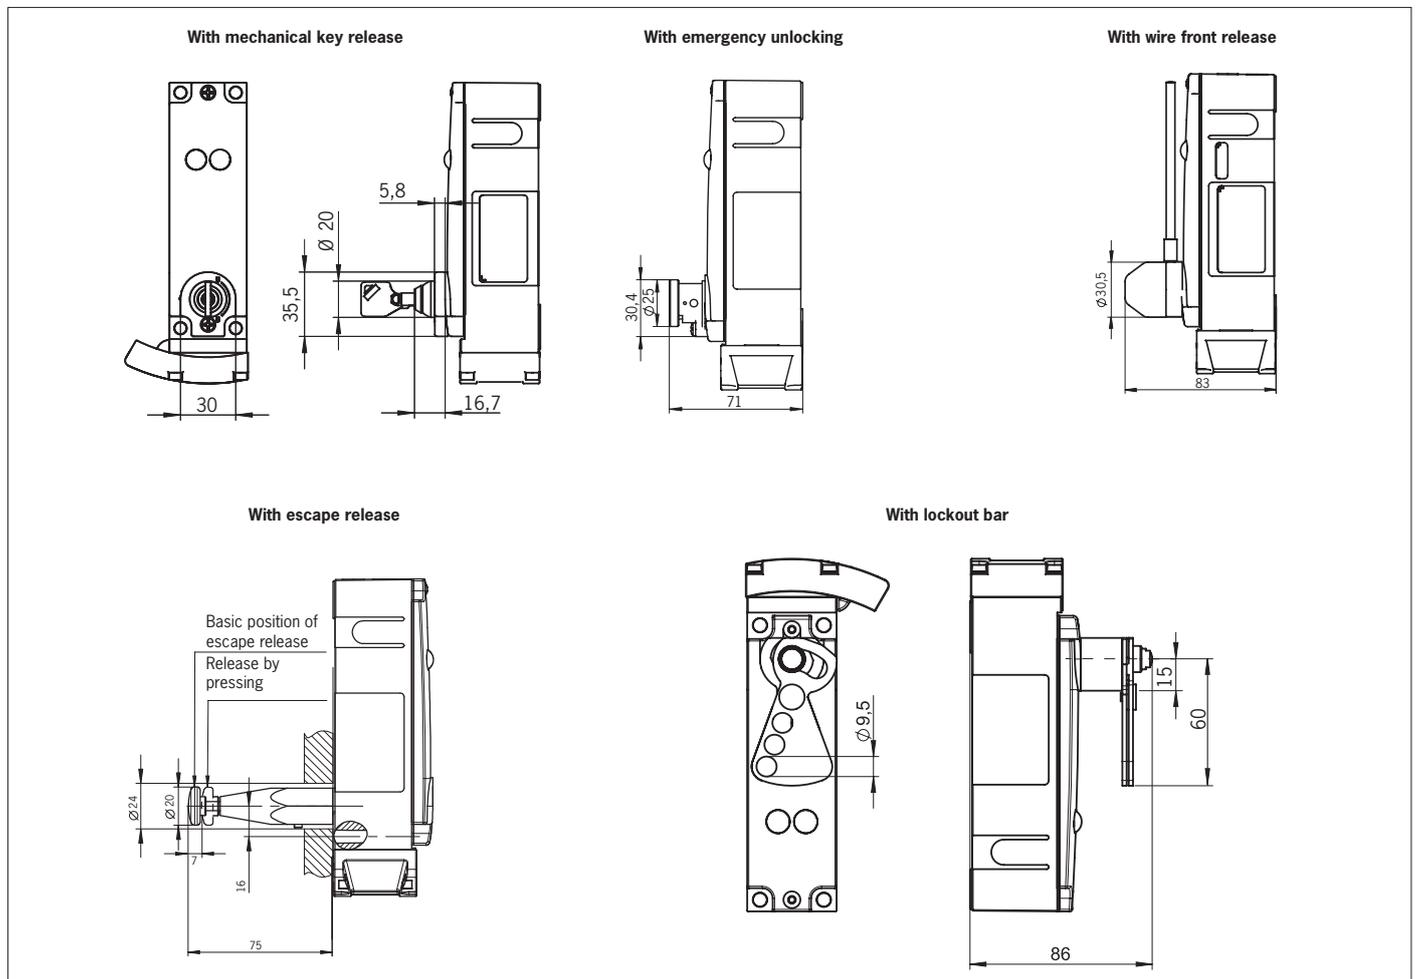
Dimensions with mechanical key release, emergency unlocking, wire front release, escape release and lockout bar
